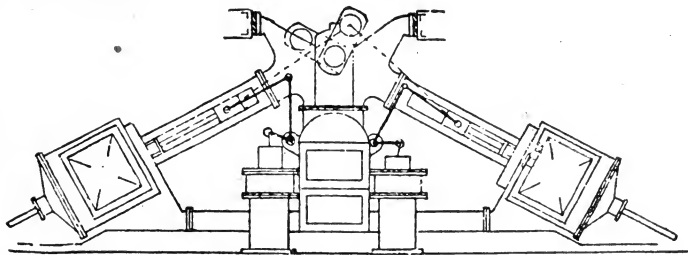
,042.—Double opposed diagonal engine showing arrangement of condenser and air pumps.
